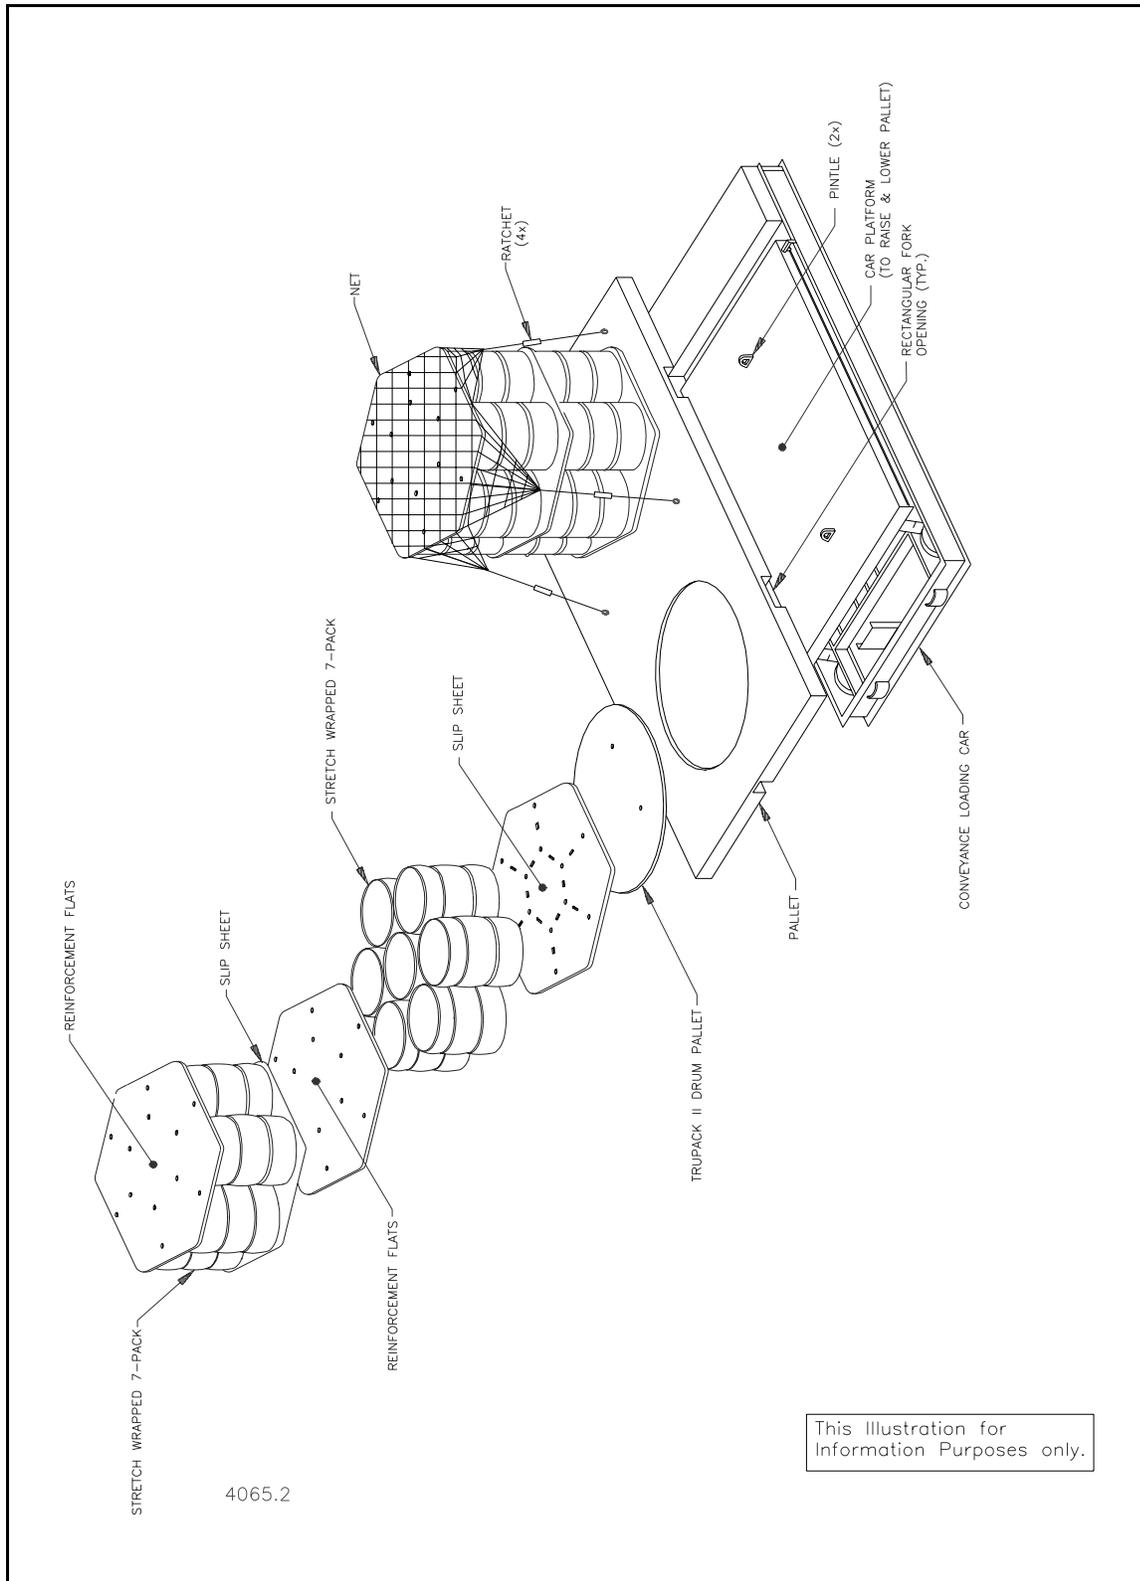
, CH TRU Waste Pallet on Conveyance Loading Car
